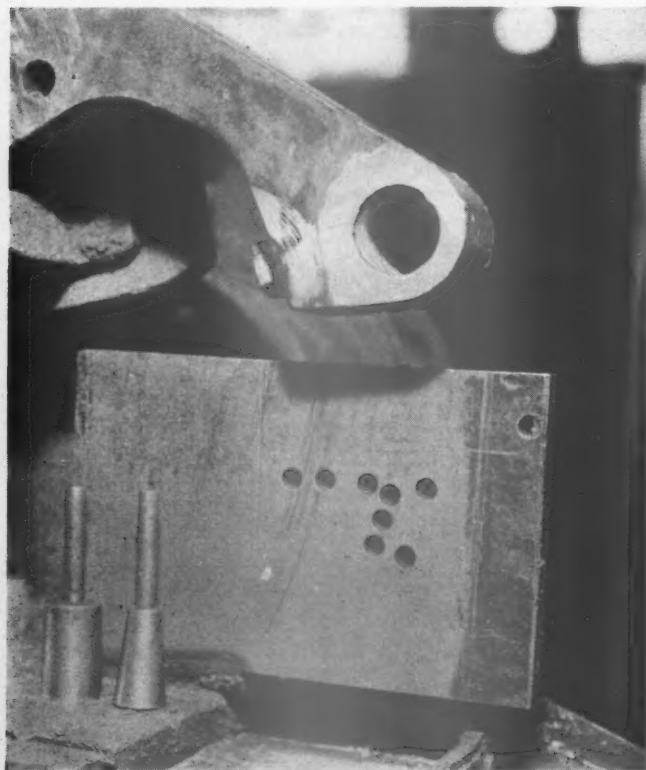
Angle plate for locating link to proper back set of foot preparatory to grinding
